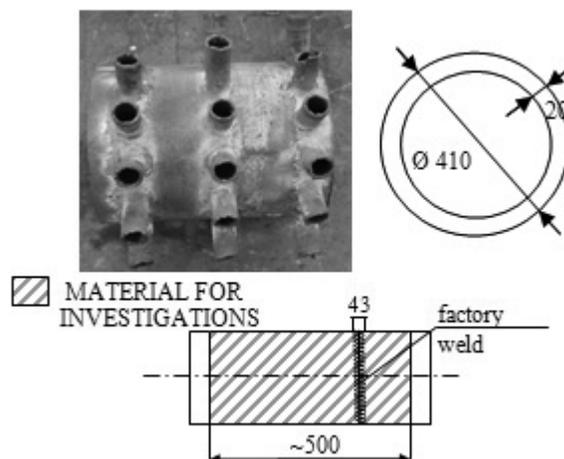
Material for investigations in the form of 13CrMo4-5 steel homogeneous circumferential welded joint of II° secondary steam superheater inlet header shell after 140,000 h service
